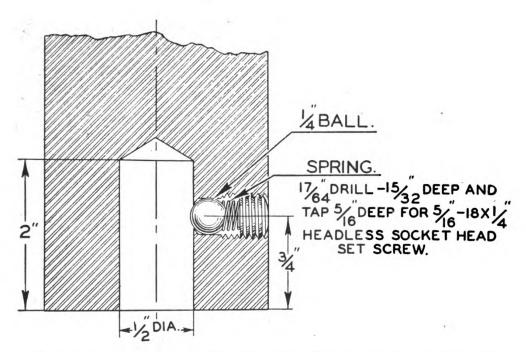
Drawing Showing Method of Adapting Ram of Arbor Press to Retain Case Magneto Tools
